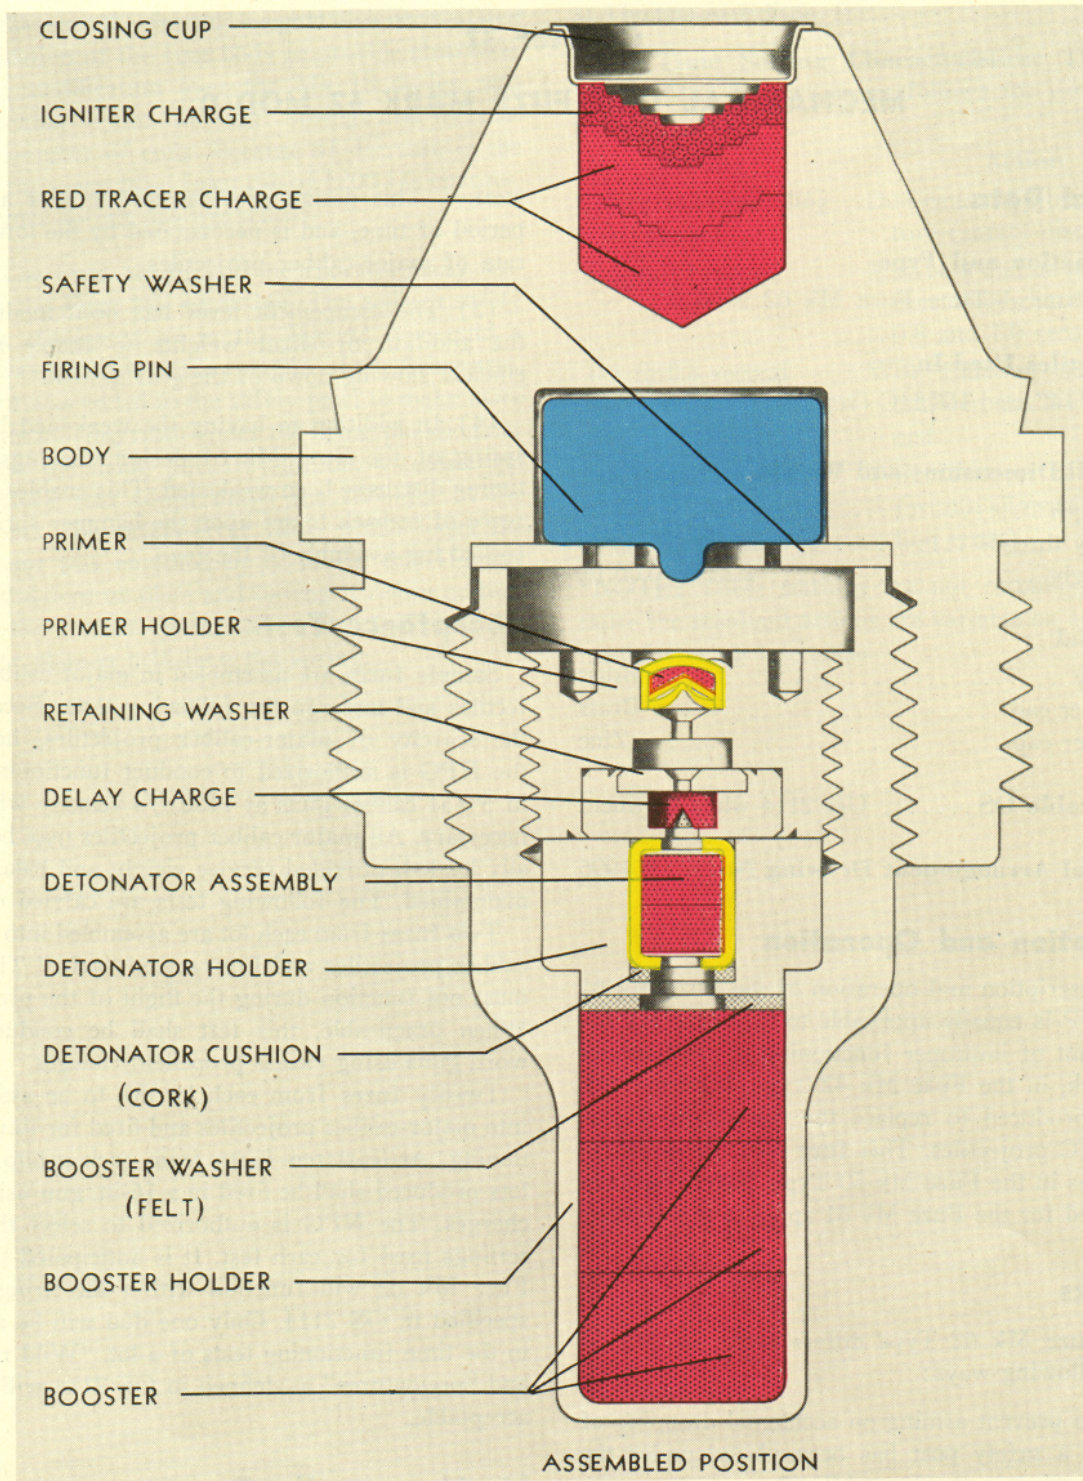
Base Detonating Fuze M66A1—Sectional View
